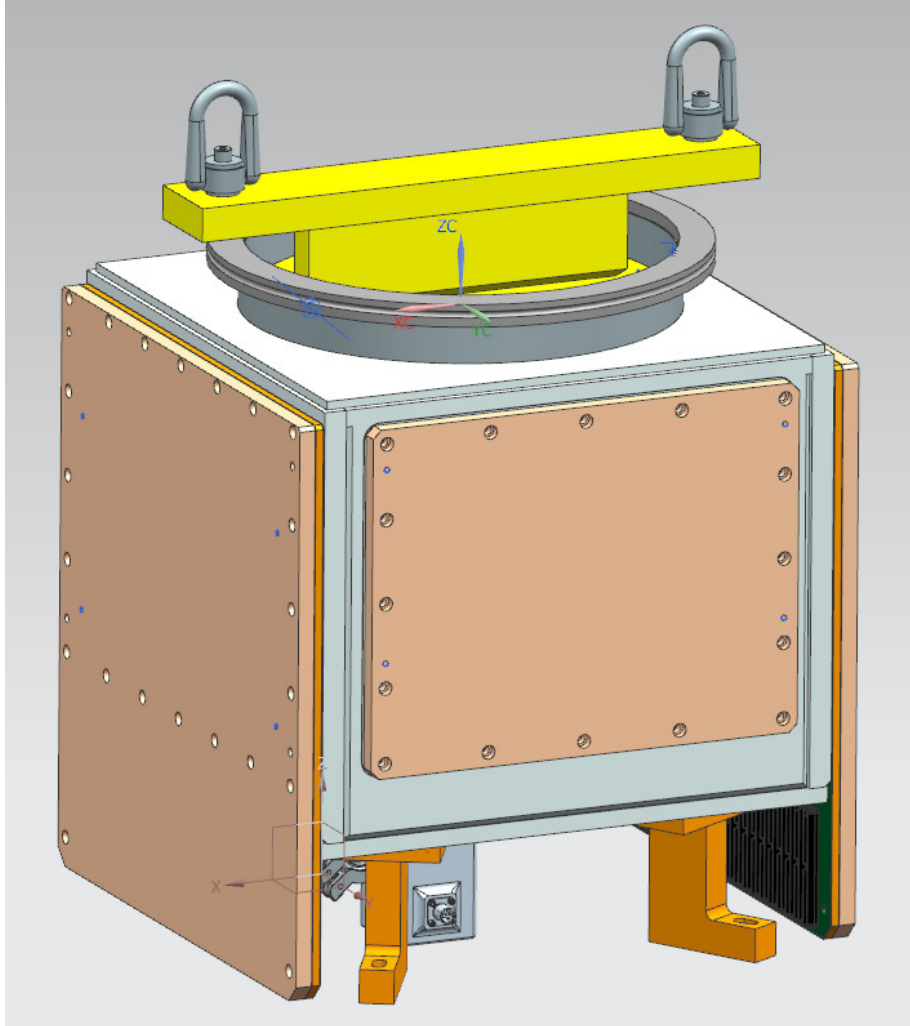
Lower vessel weldment with lifting fixture
